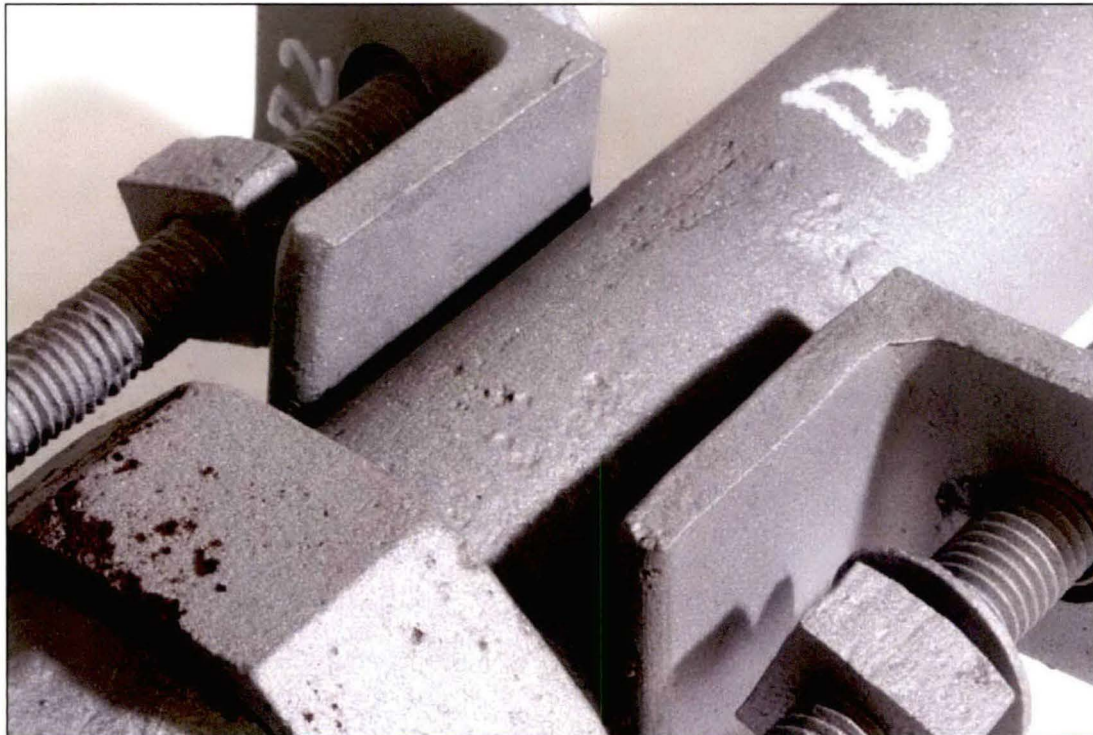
Image of the underside of Lugs B1 and B2 showing that no welding had been performed.
